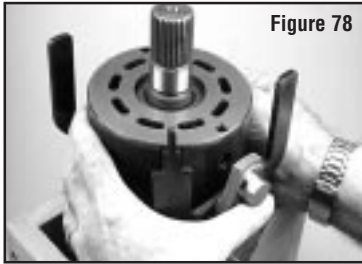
Lubricate and install the input shaft into the rotating group and swashplate assembly. (see Figure 78)
